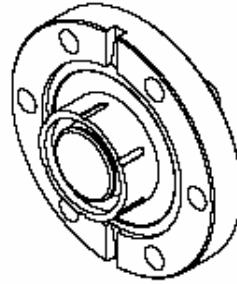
Isometric view of the new design of the prototype, designed by Maik Siemens, DESY on 3D Cad System IDEAS.
